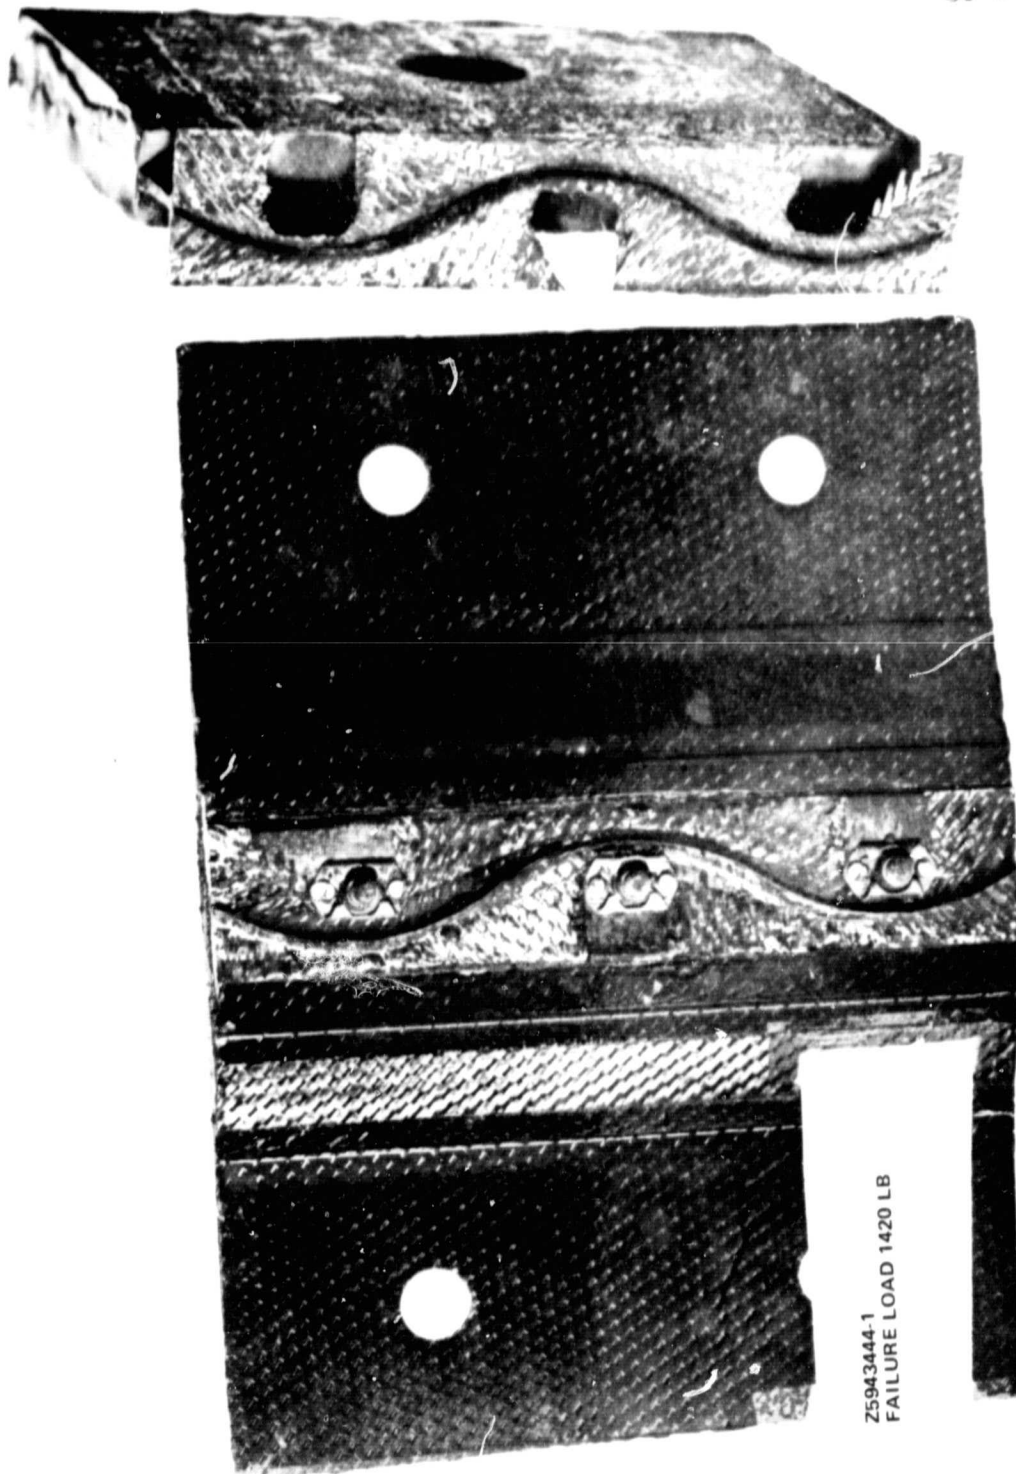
FAILURE OF SINE-WAVE BOLTED SPECIMEN
